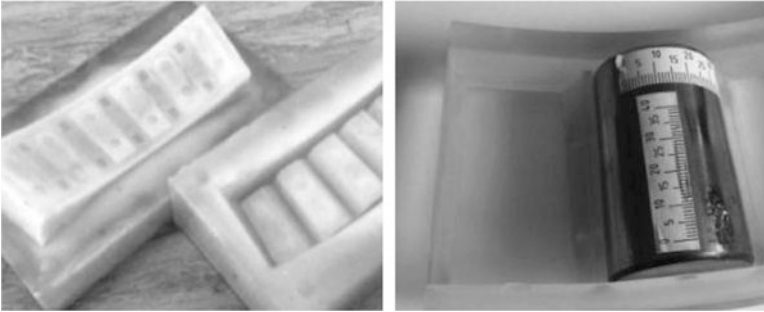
Silicone molds and casting bearing cage with rolling elements
